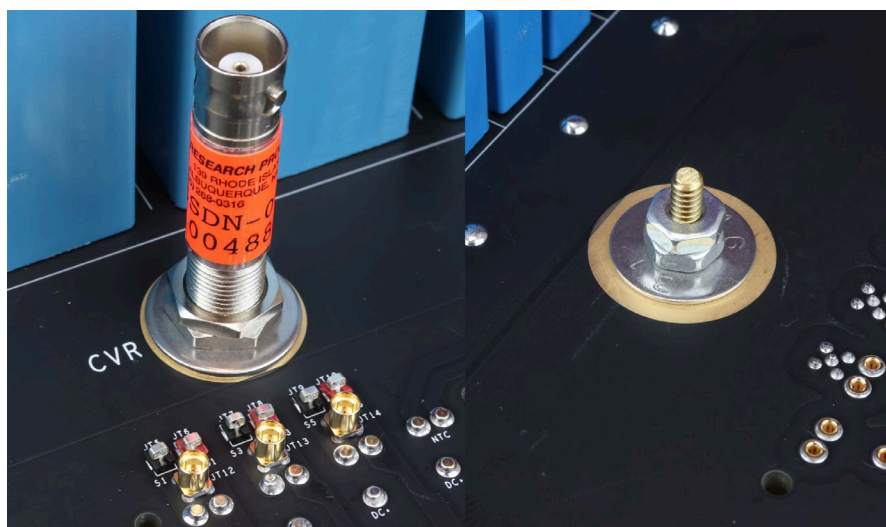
Tubular SSDN CVR Installed in PCB from Top View (Left) and Bottom View (Right)
